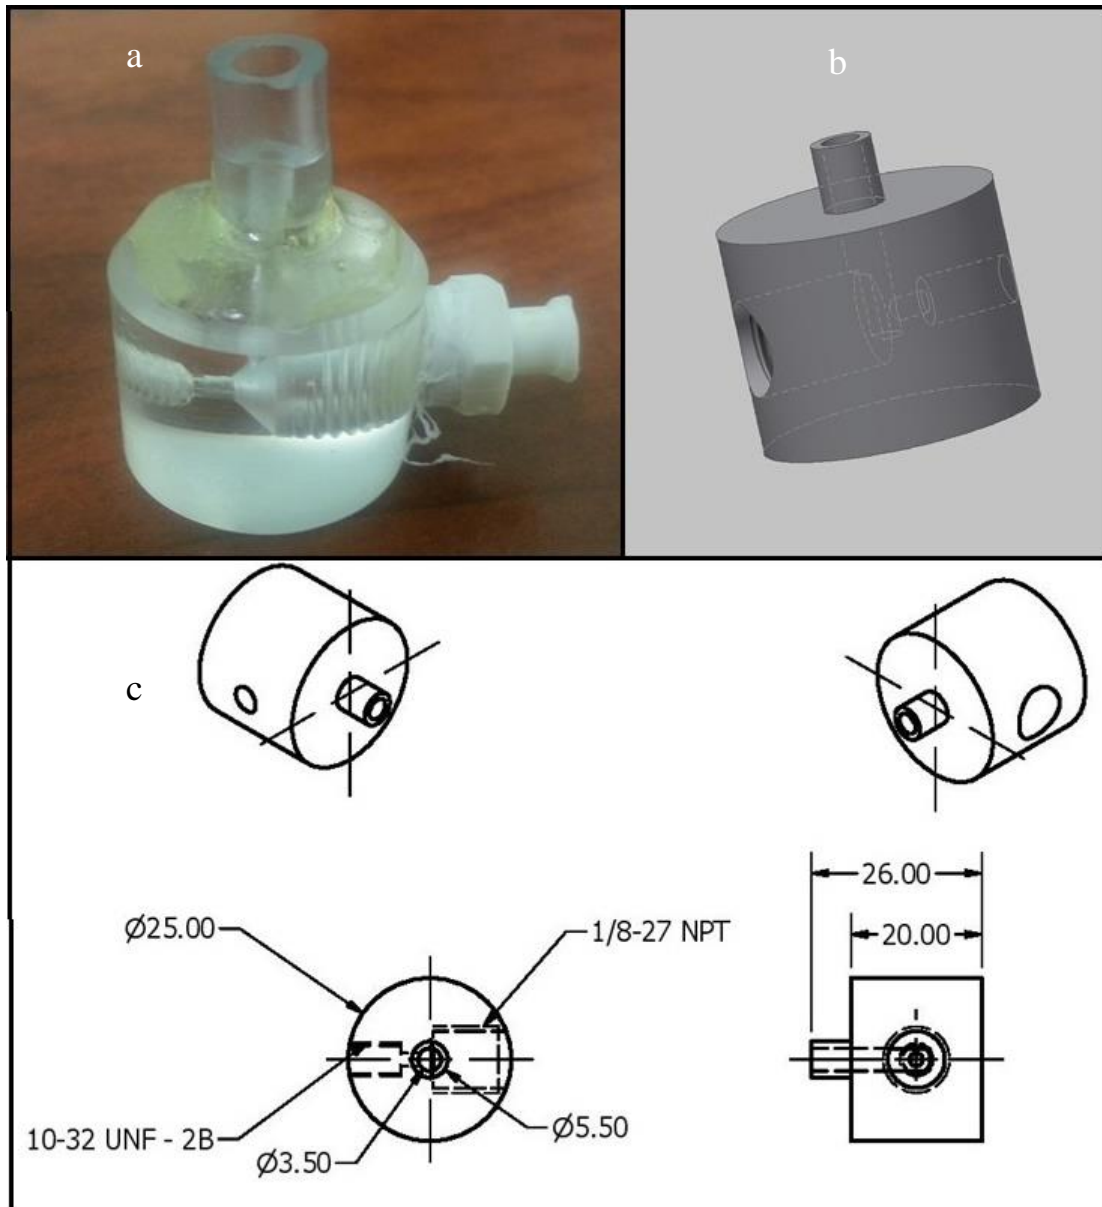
Pressure transducer microfluidic adapter a. Picture demonstration. b. 3D schematic; c. Technical drawing.
